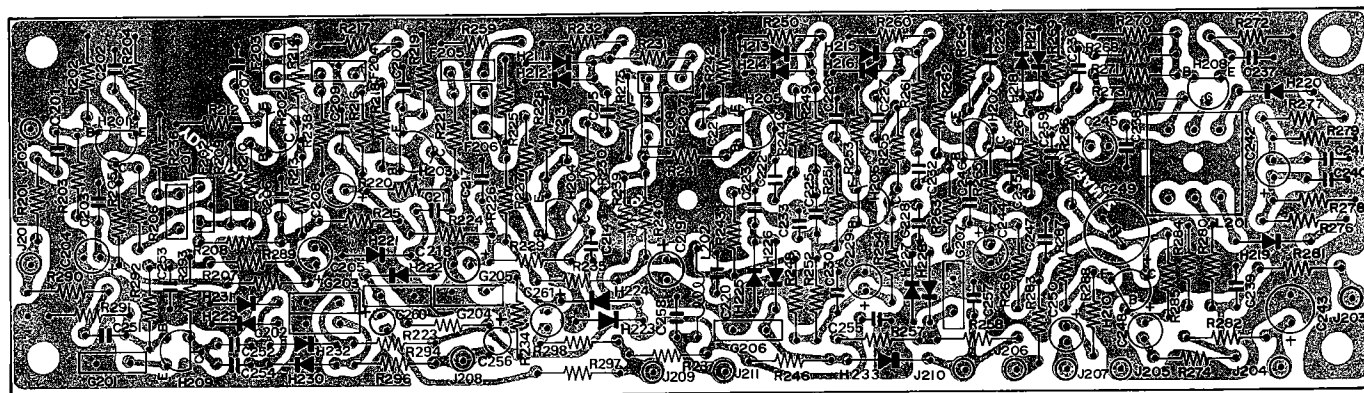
FM IF Amplifier Assembly P200 Component Locations
